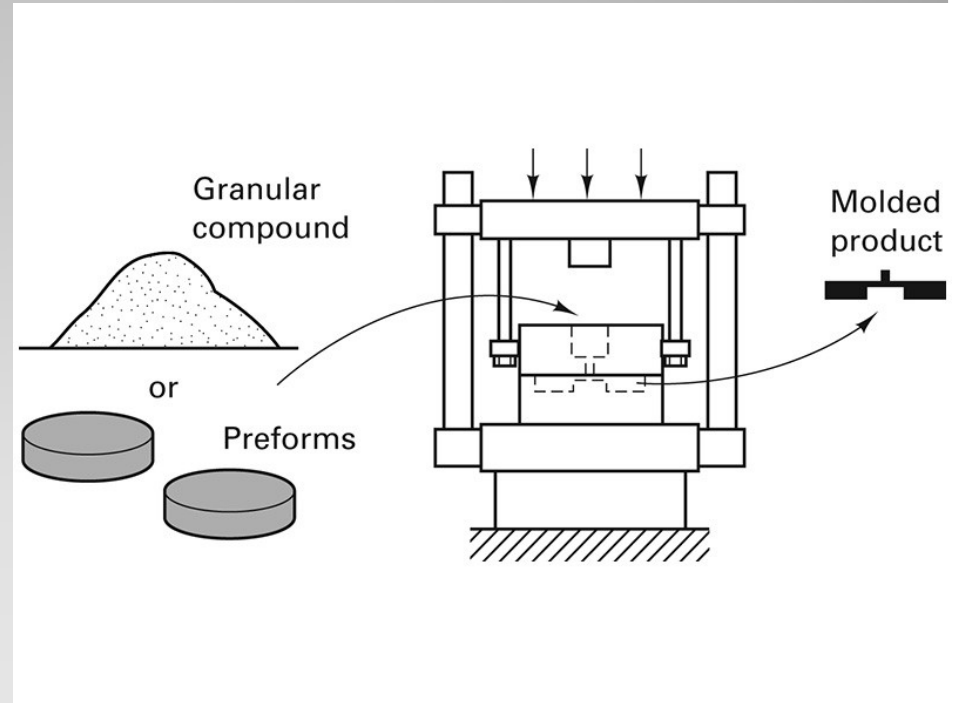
The hot-compression molding process: (1) solid granules or a preform pellet is placed in a heated die; (2) a heated punch descends and applies pressure; and (3) after curing (thermosets) or cooling (thermoplastics), the mold is opened and the part is removed.
